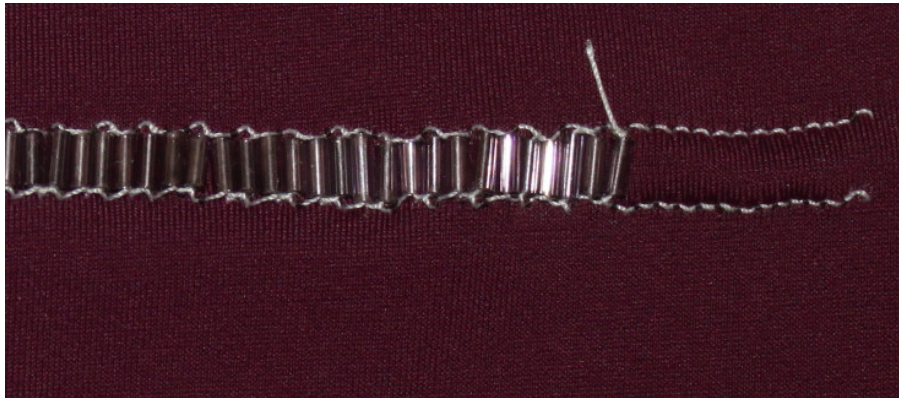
Attaching Beads with Flat Lock Sewing Machine
